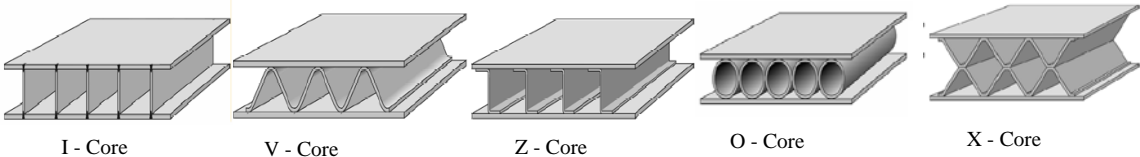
Some Examples of Prismatic Core Designs Ideal for Laser Stake Welding
